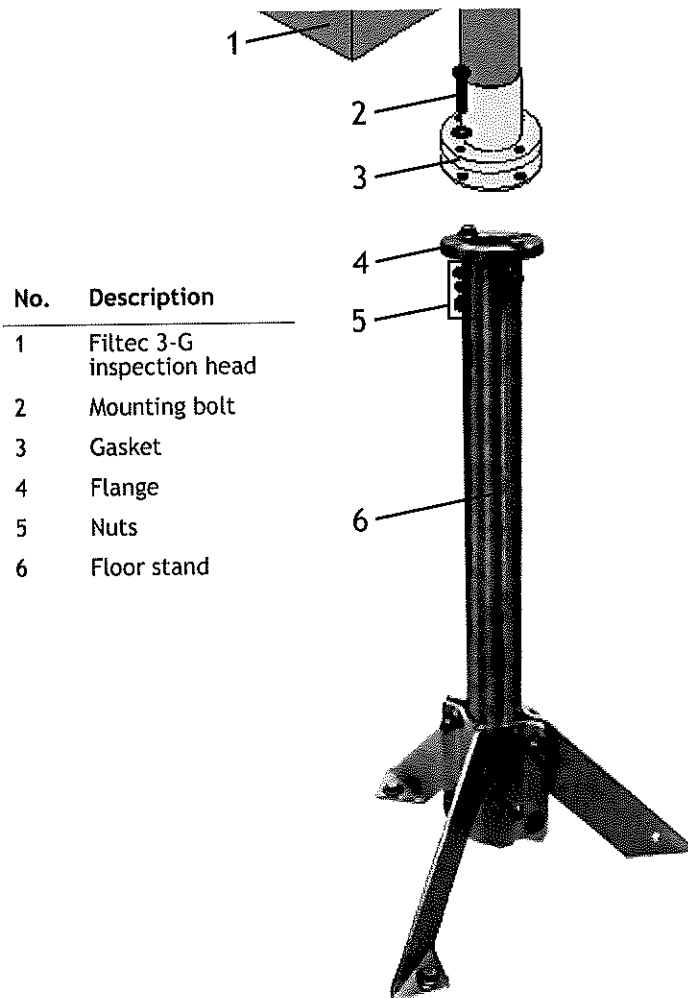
Mounting the Inspection Head on the Vertical Support Pipe
